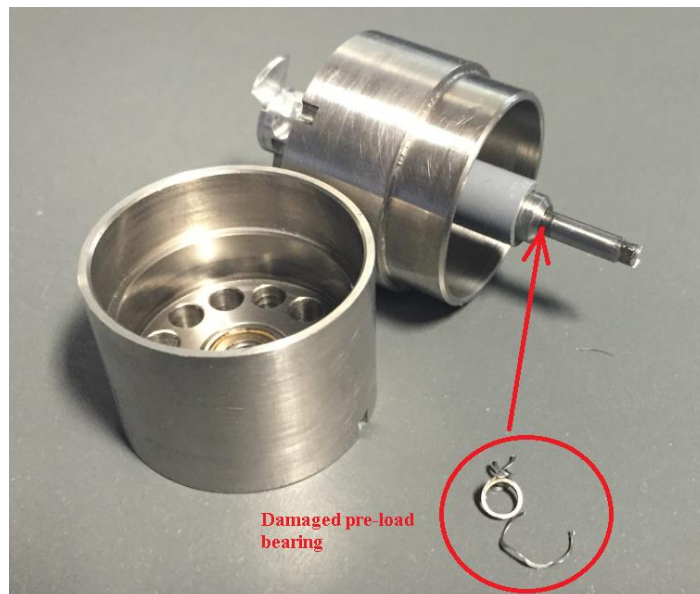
Damaged pre-load bearing after disassembling the rig
